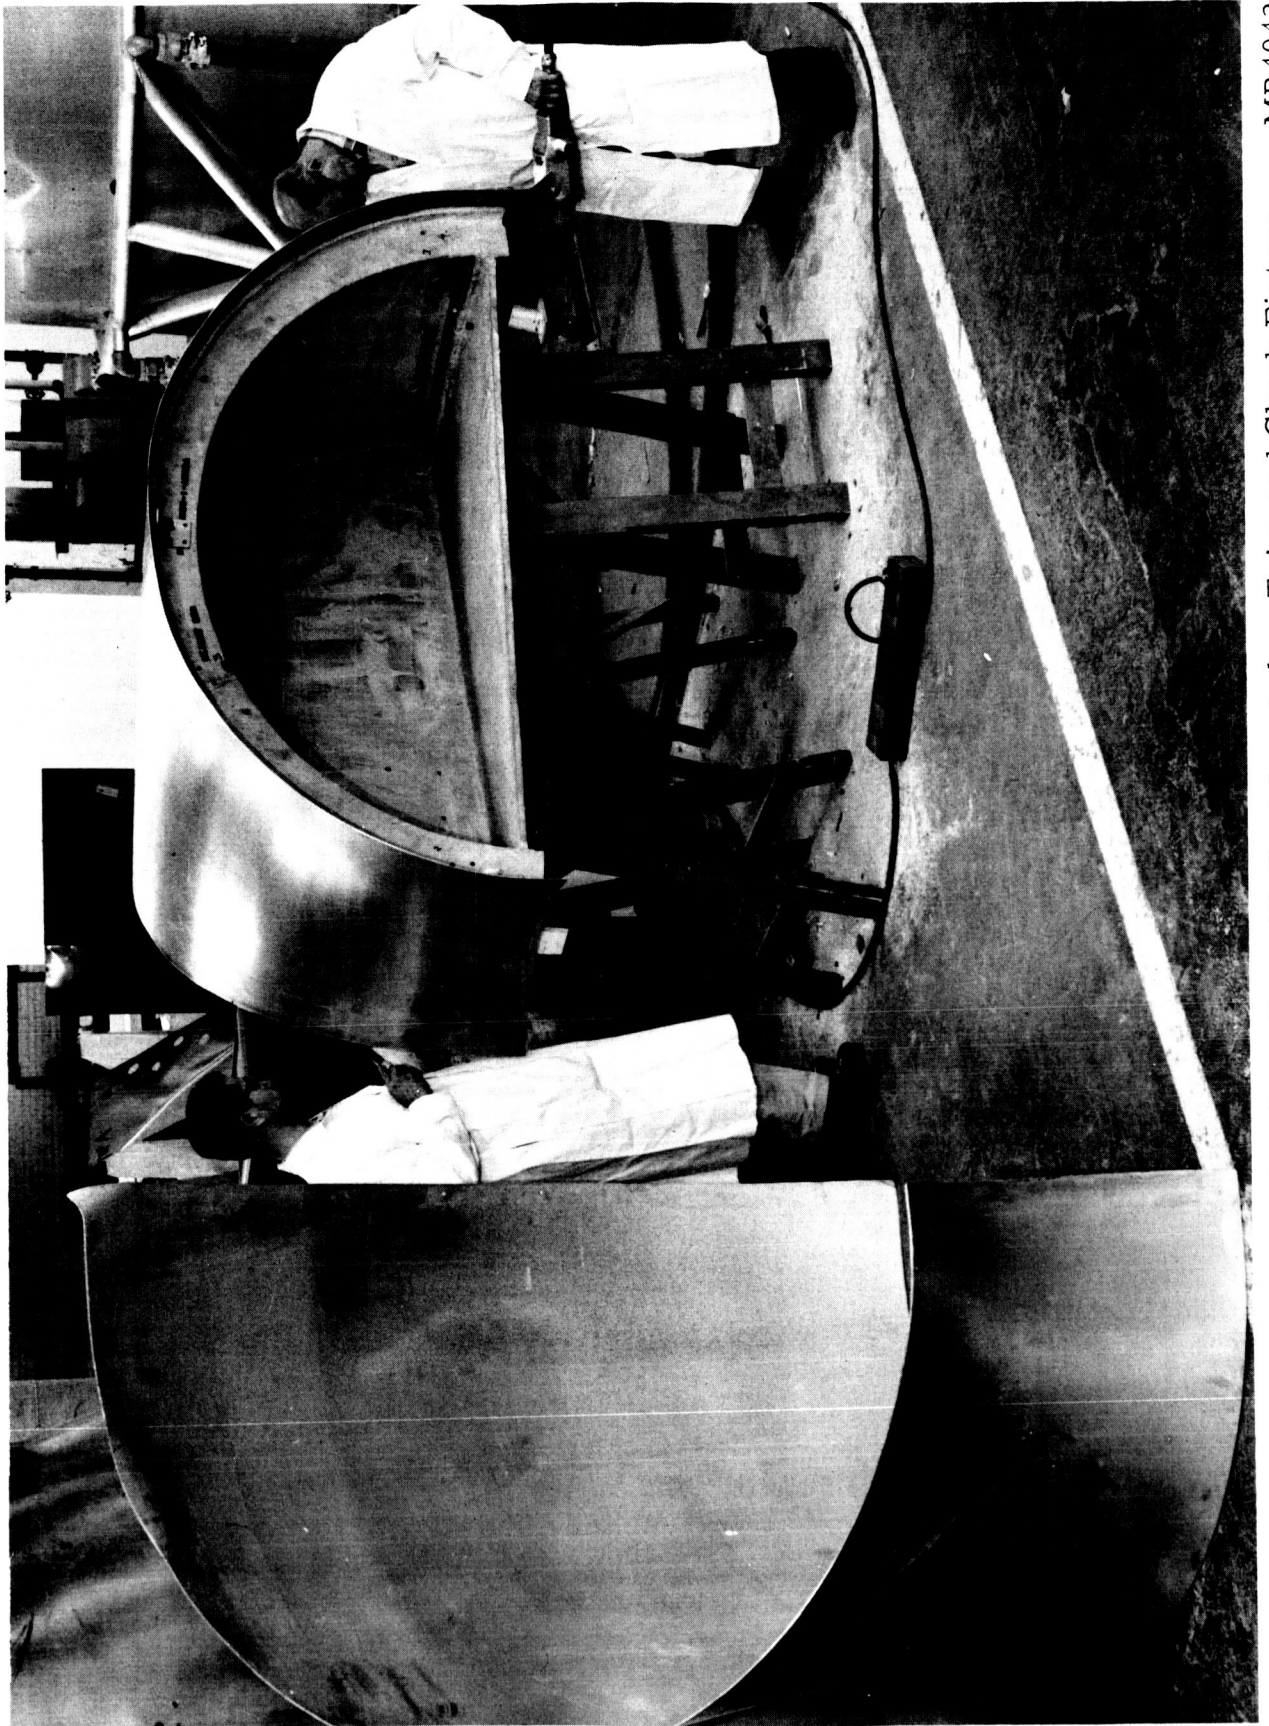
Trimming Operation with Part Located on Trim and Check Fixture MR4042
